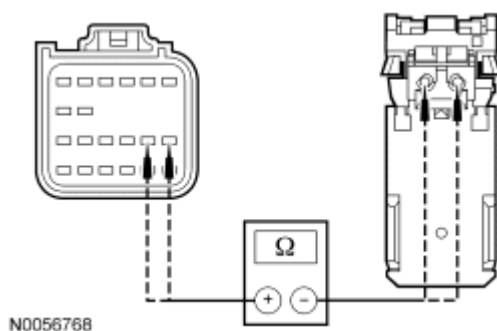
Measuring Resistance Between RCM C310A-13, Circuit CR104 (YE/GY) & Passenger Air Bag Module C256B-1
